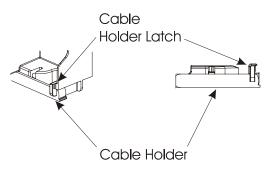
RTU Power and Ground Connections – All Other Installations
